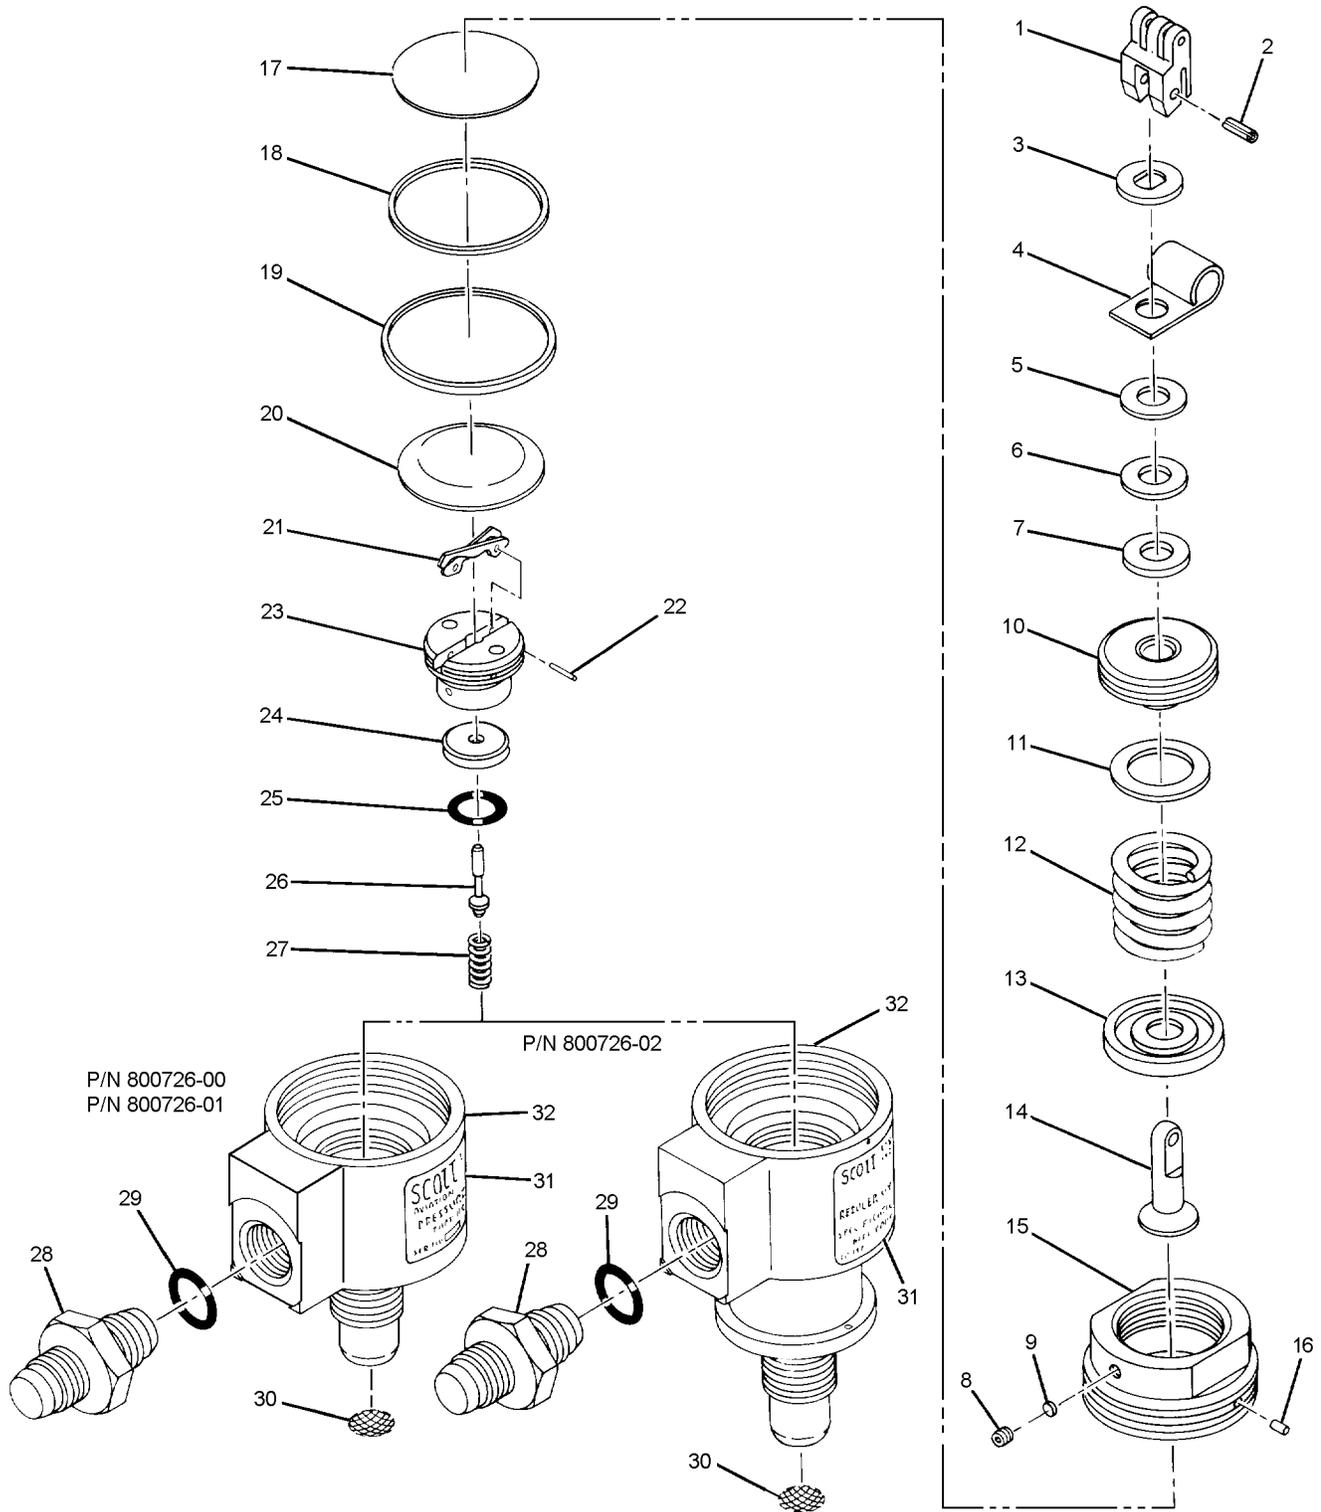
Emergency O₂ Actuator Assembly (Scott) (Sheet 2 of 2)
